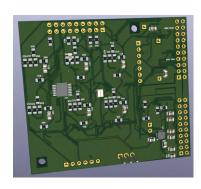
Back 3D View of Version 3.1 Signal Processing Board
